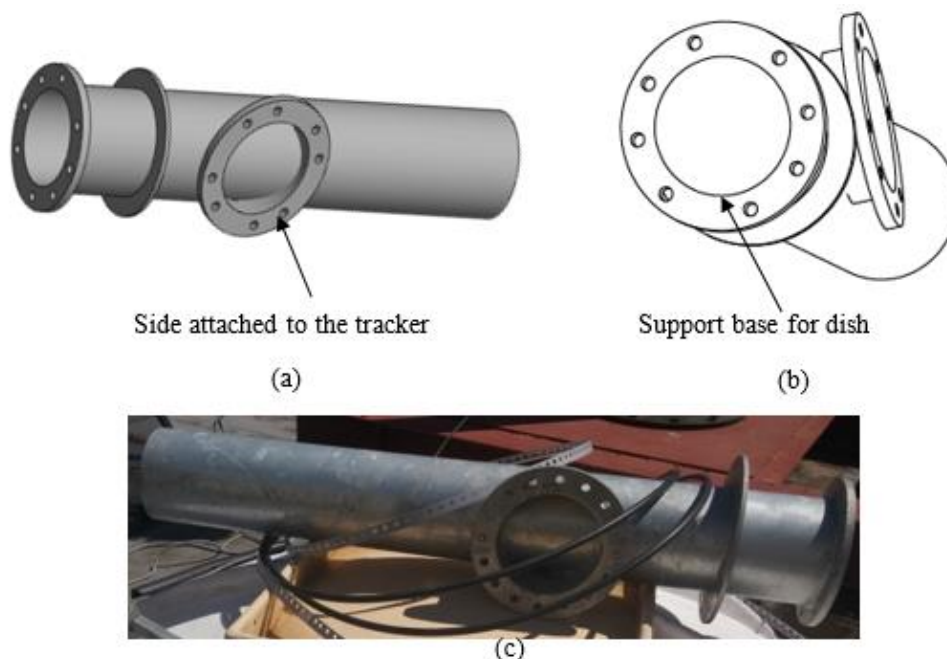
CAD drawing showing dish supports joints: side bolted to the tracker stand (a); the base on which the dish sits (b); manufactured frame (c)
